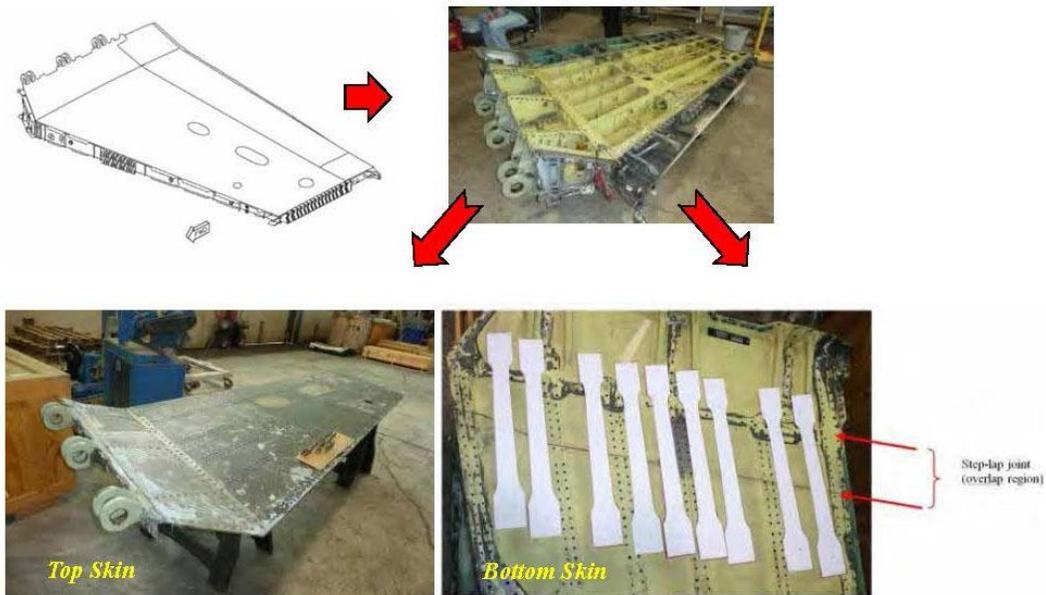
Wing Skin Removal and Specimen Extraction
